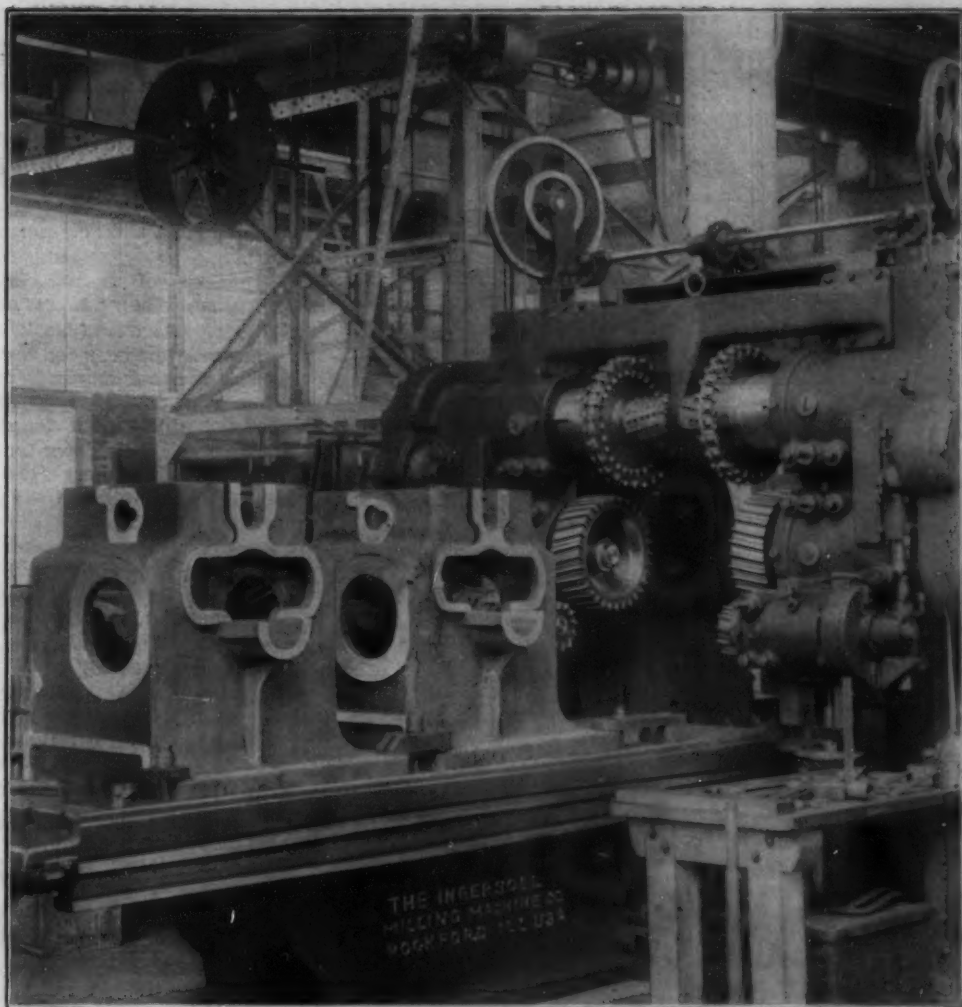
Special Ingersoll Milling Machine for Finishing Crank Cases.
